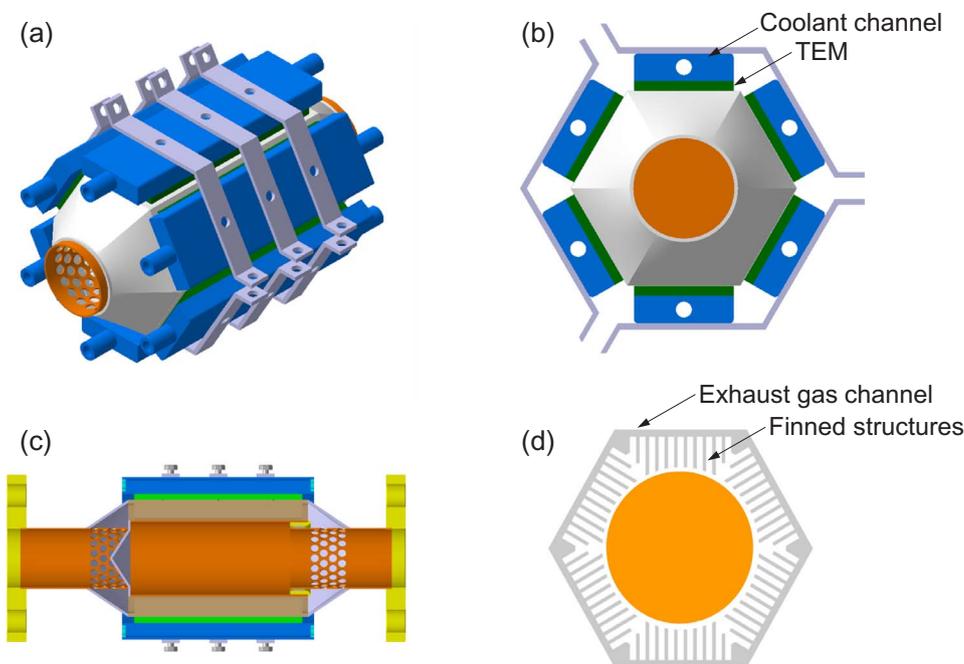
Schematic diagrams of present hexagonal TEG: (a) isometric view, (b) front view, (c) cross-sectional side view of TEG, and (d) cross-sectional front view of exhaust gas channel.
